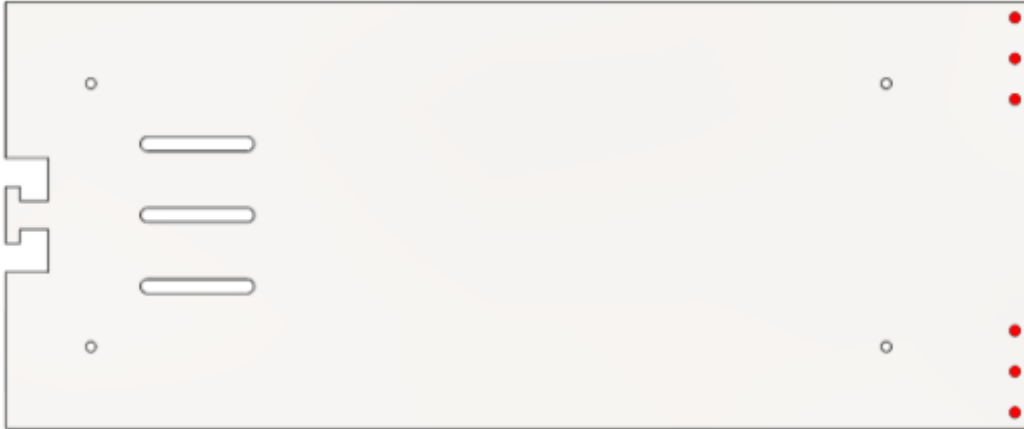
The mounting holes for the hinges on the ramp plate, marked in red.
